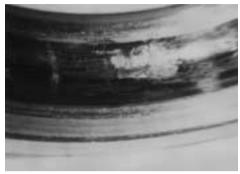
Seizure on Outer Ring Raceway of Deep Groove Ball Bearing
